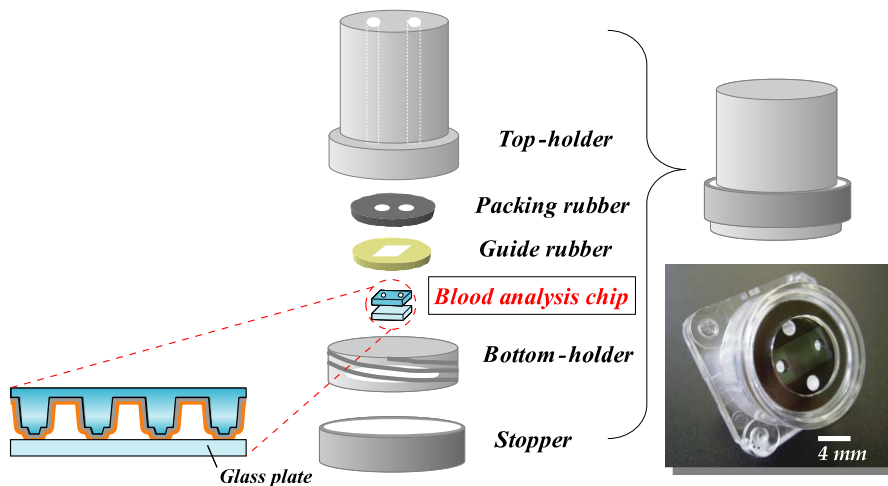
Chip assembly for blood flow test and its photograph [6].
